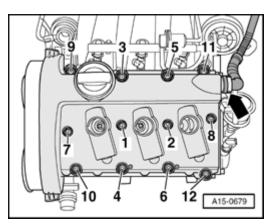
Removing Hose Of Crankshaft Housing Ventilation & Unscrewing Bolts For Left Cylinder Head Cover In Sequence
